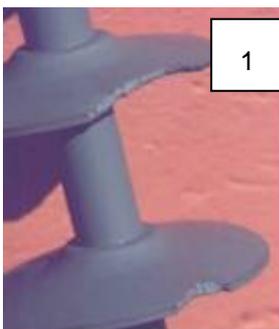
Line post insulator that has been fractured by overloading during stringing operations.
